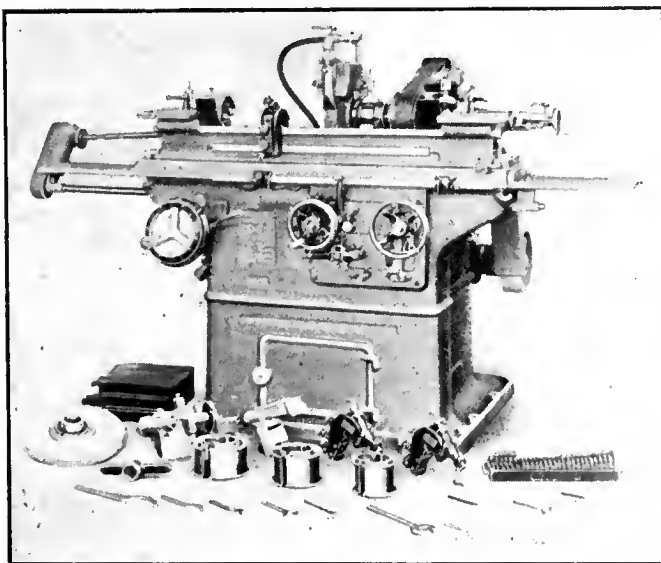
CONSTANT SPEED DRIVE GRINDING MACHINE.
